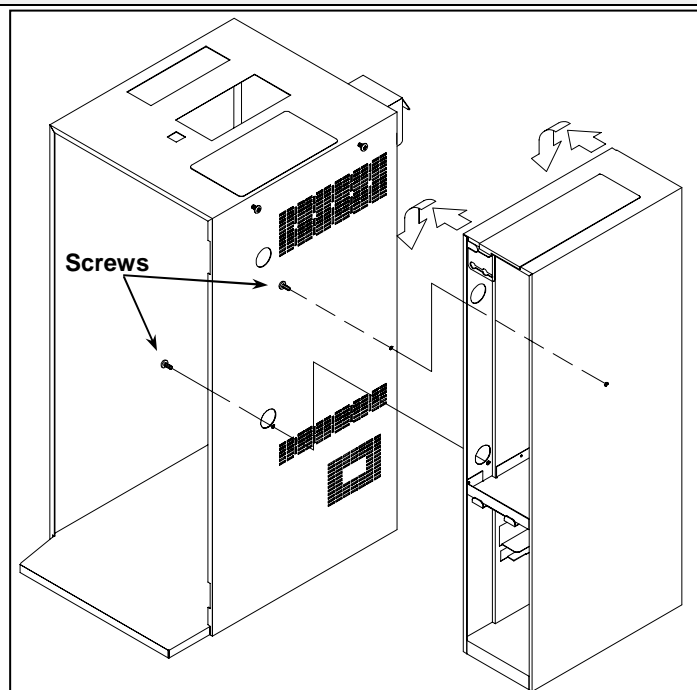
Mount the unit to the side of machine, then secure it in place with the screws.
